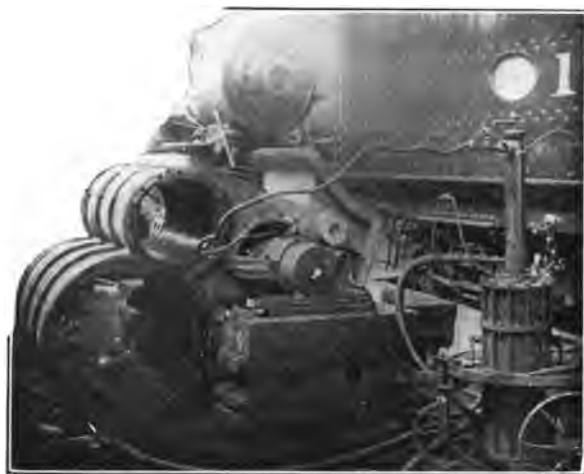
HYDRAULIC MACHINE FOR PRESSING IN AND REMOVING PISTON-VALVE BUSHINGS FROM CYLINDER CASTING. DEVISED BY AN ERECTING-SHOP FOREMAN.
